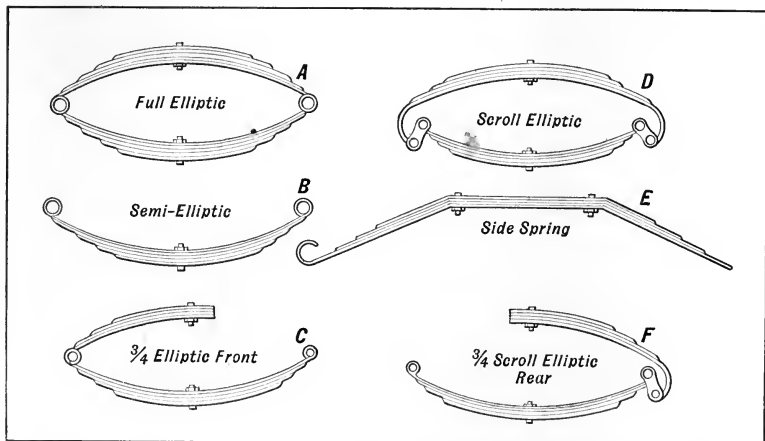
Springs Usually Employed for Supporting Motor-Car Frames and Horse-Drawn Vehicle Bodies.
